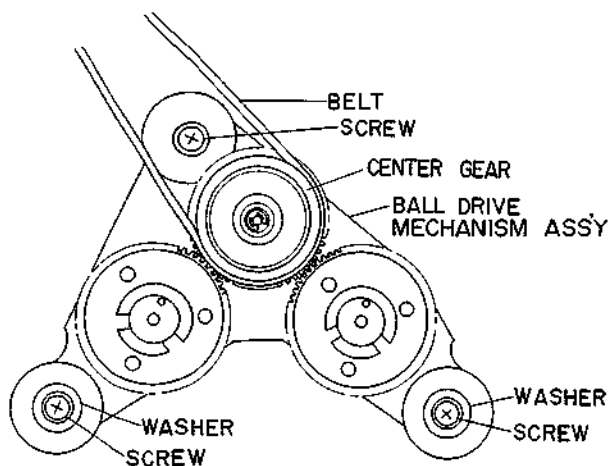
Ball Drive Mechanism Ass'y Replacement
